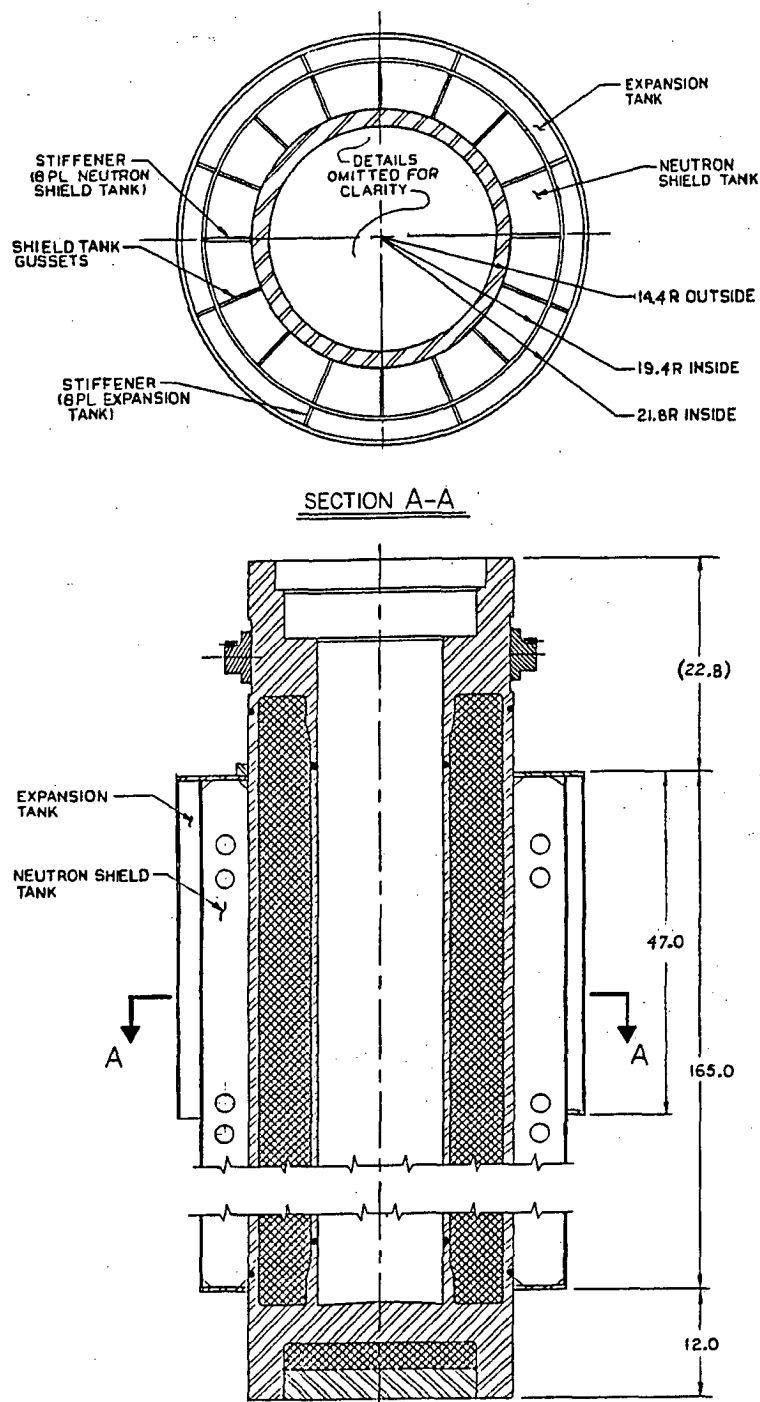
Component Parts of Shield Tank Structure
